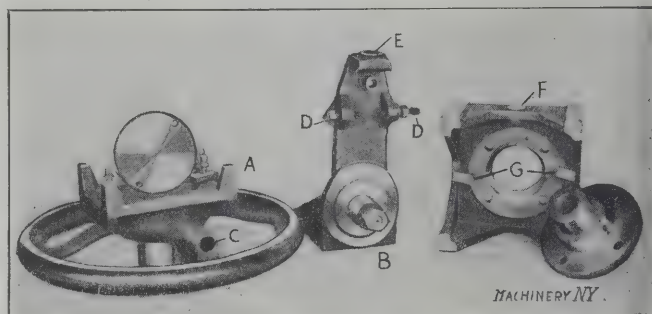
Jigs for Drilling Parts of Device shown in Fig. 5
